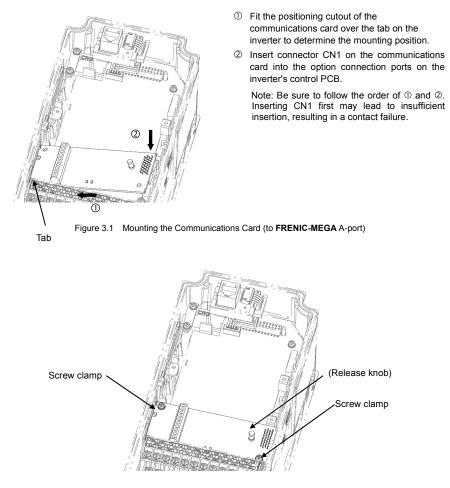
Mounting Completed (on FRENIC-MEGA A-port)
